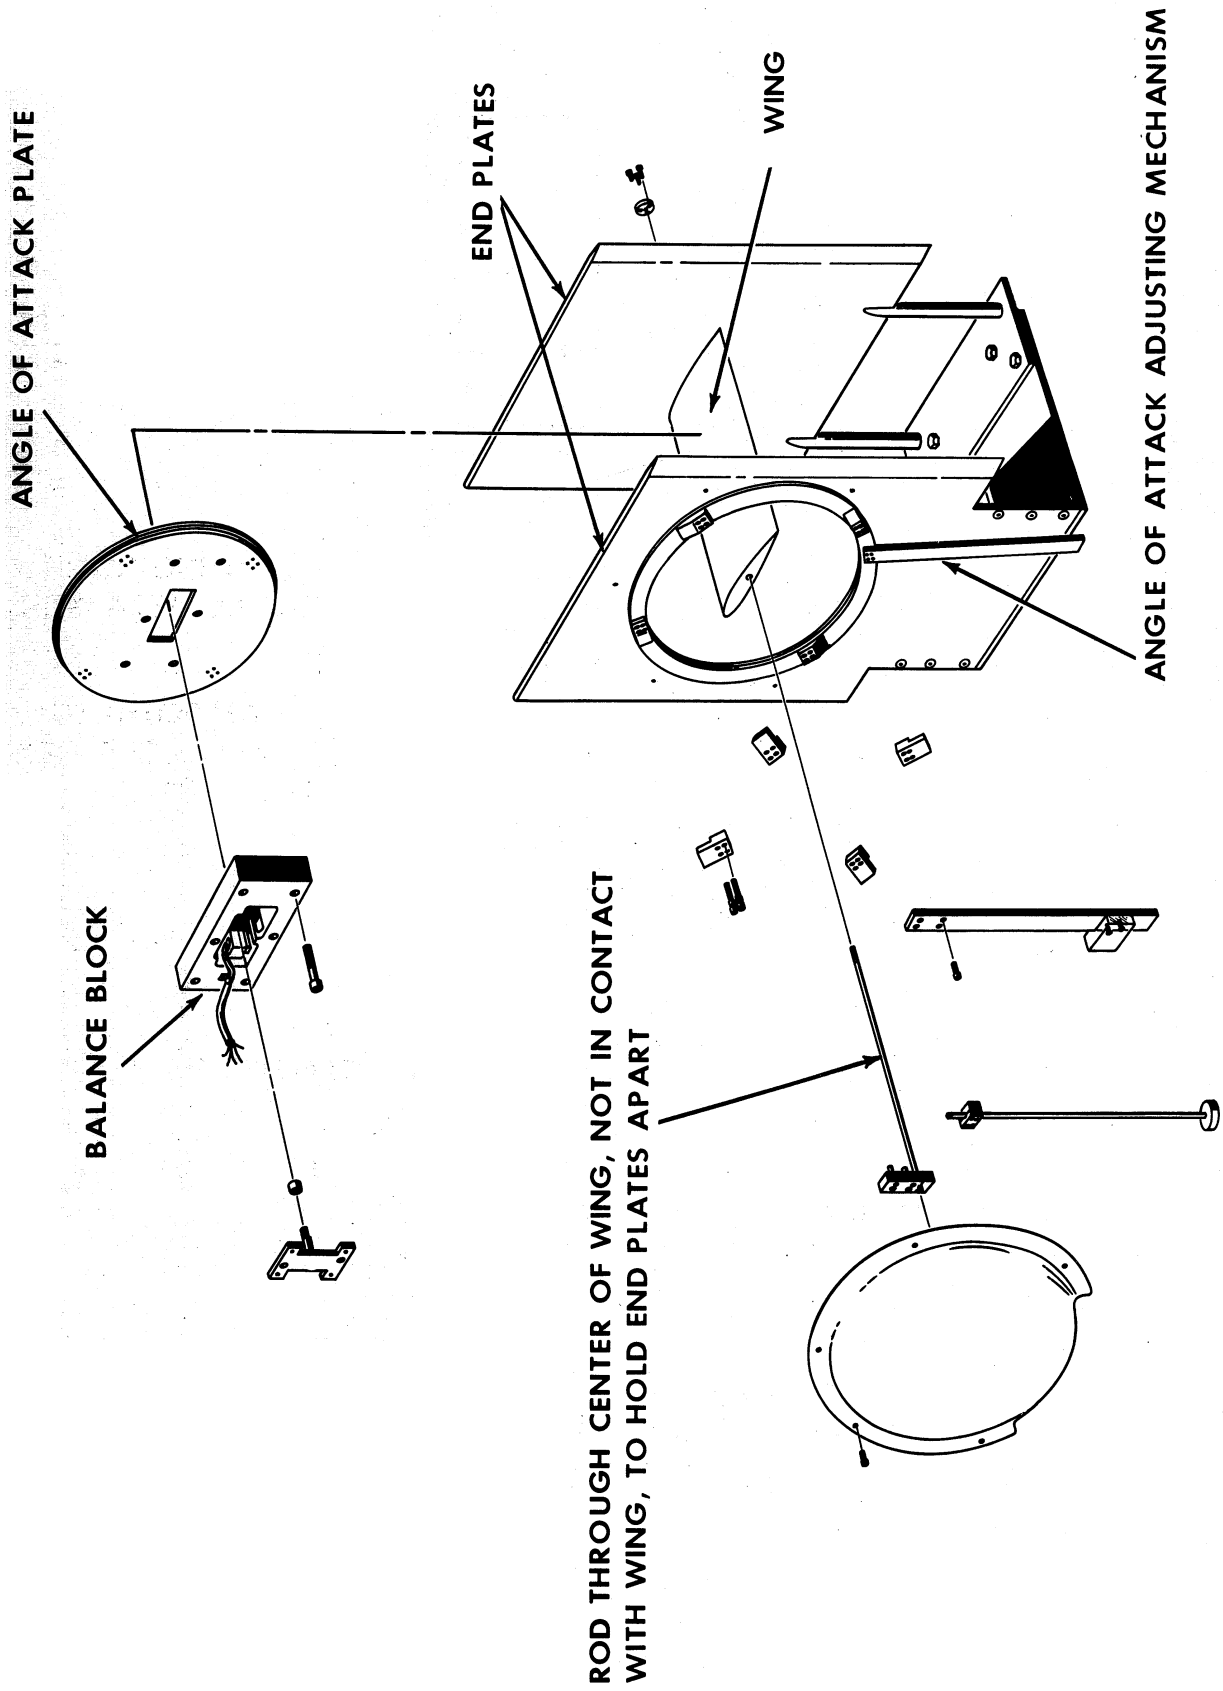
Exploded view of balance as used in Moving Bump Gust Generator.
